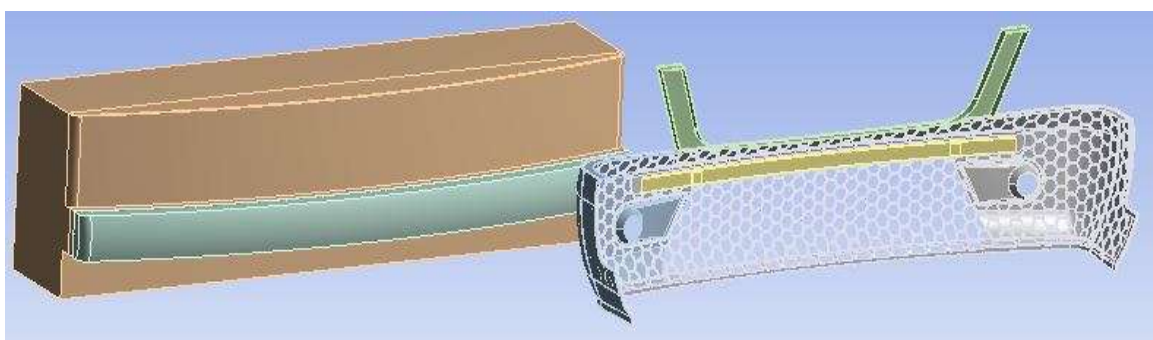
(b): Assembly for corner impact test (15% overlap from edge)
